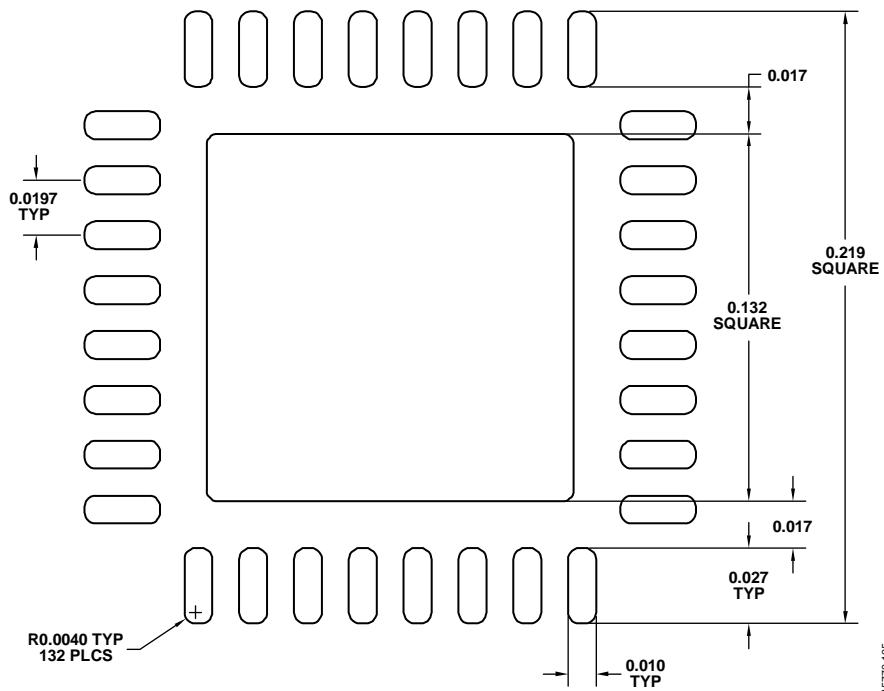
Solder Paste Stencil of the ADMV1009-EVALZ
